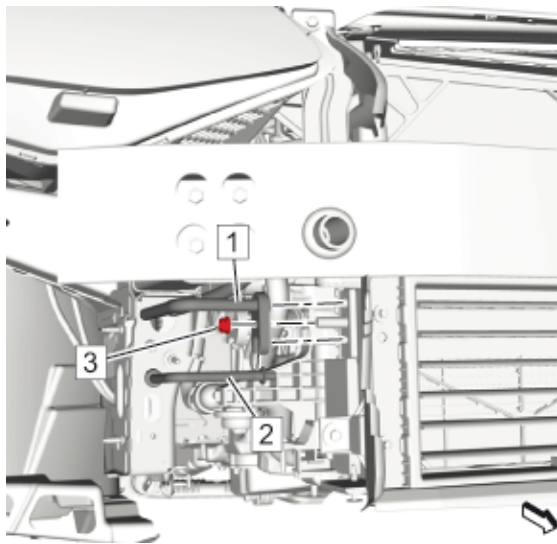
Air Conditioning Evaporator Tube, Condenser Tube And Nut
